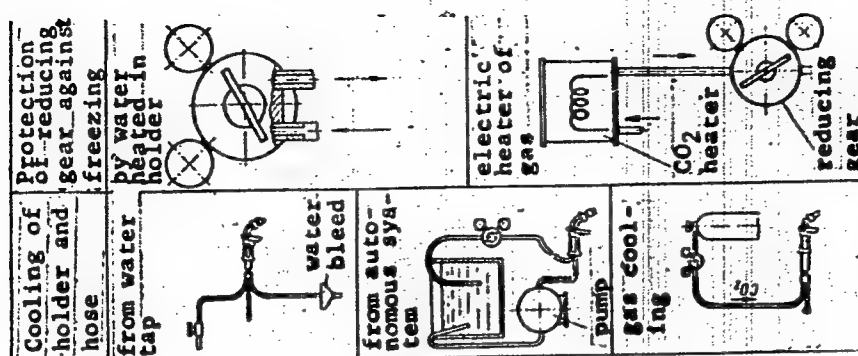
, b. Variants of accessories for TsNIITMA Sh-designed standardized semiautomatic welding machines
